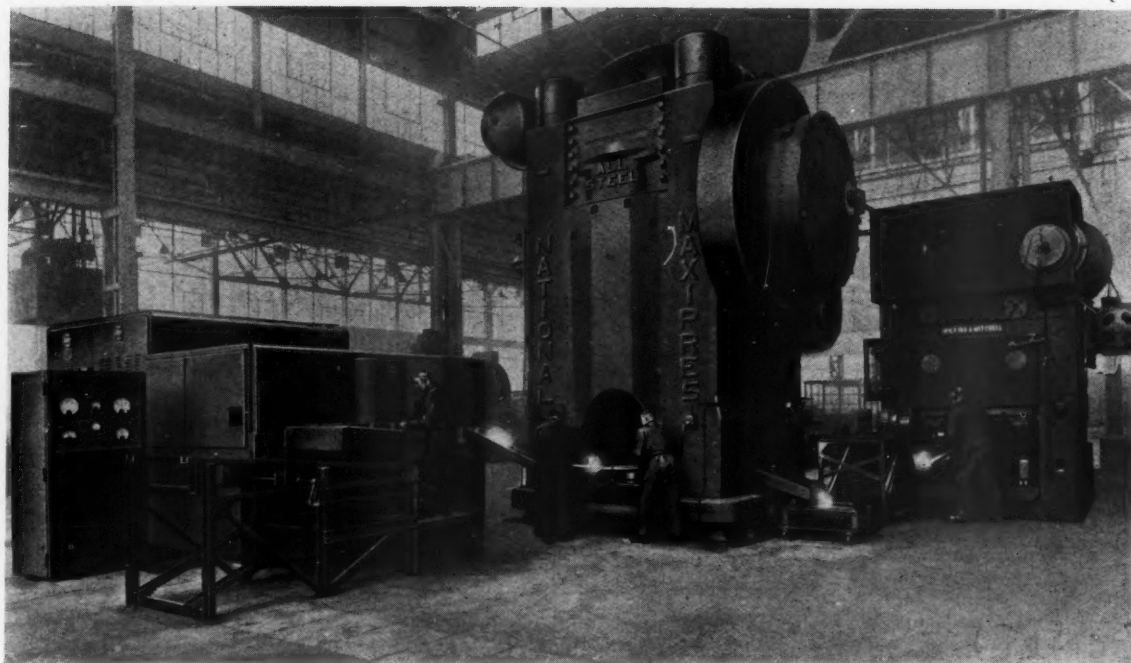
800 kW induction heater, 5000 tons forging press and trimming press.
